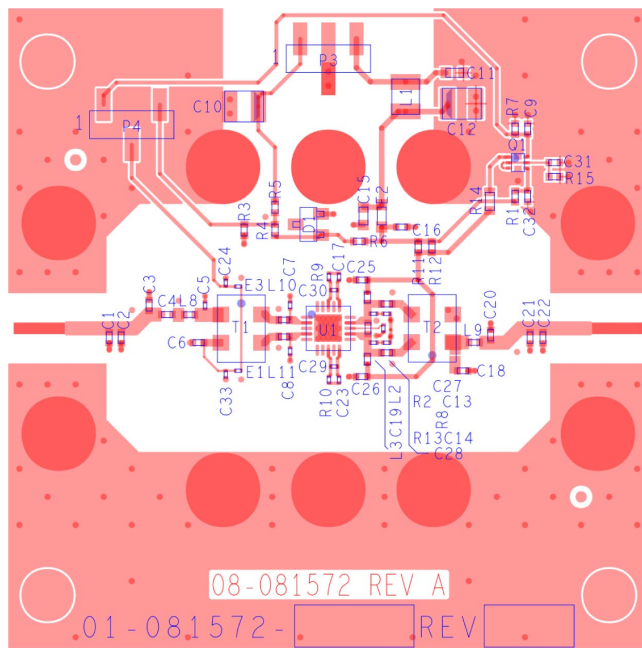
ADCA5192-EVALZ Assembly Drawing (Top Side)
